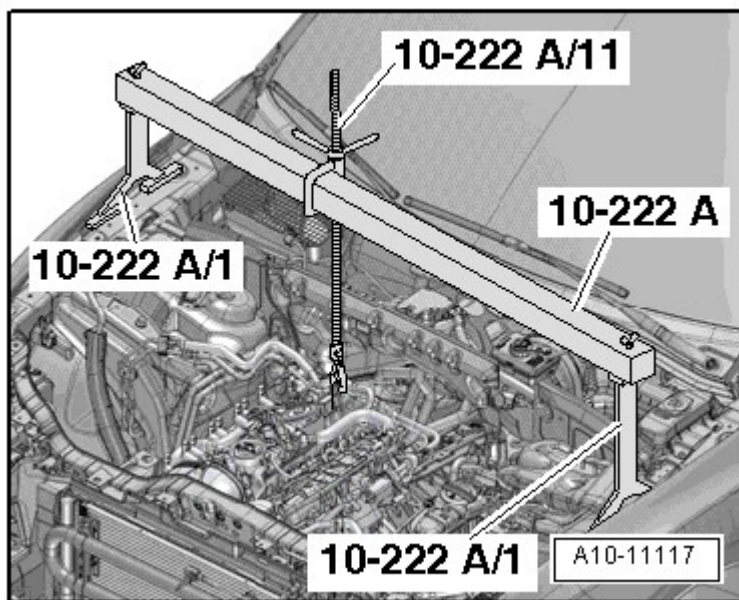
Positioning 10 - 222 On Left And Right Suspension Strut Tower
